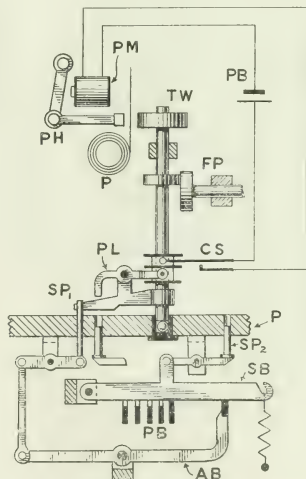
Eglin's permutation-bar type-wheel printer.
